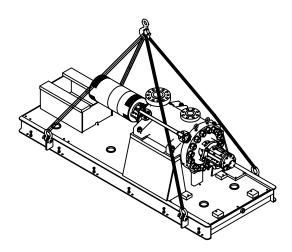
Example of the proper lifting method for baseplate-mounted units without a driver
